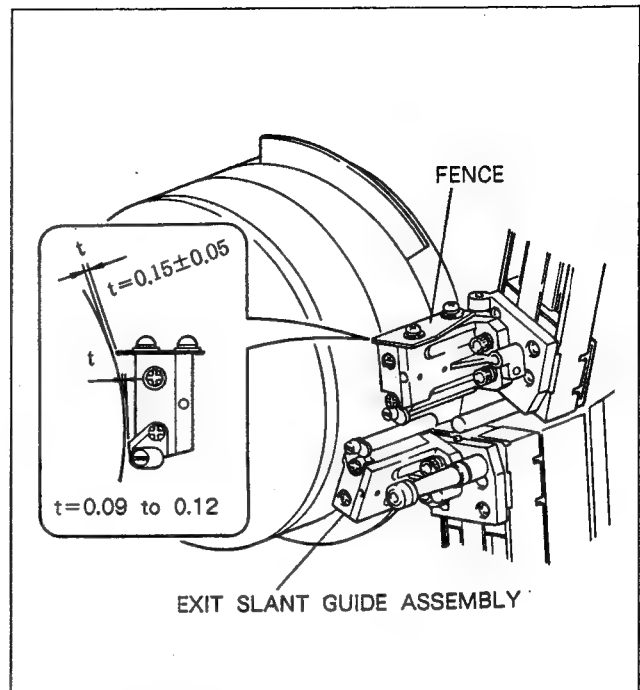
Checking Clearance Near Slant Guide Assembly
